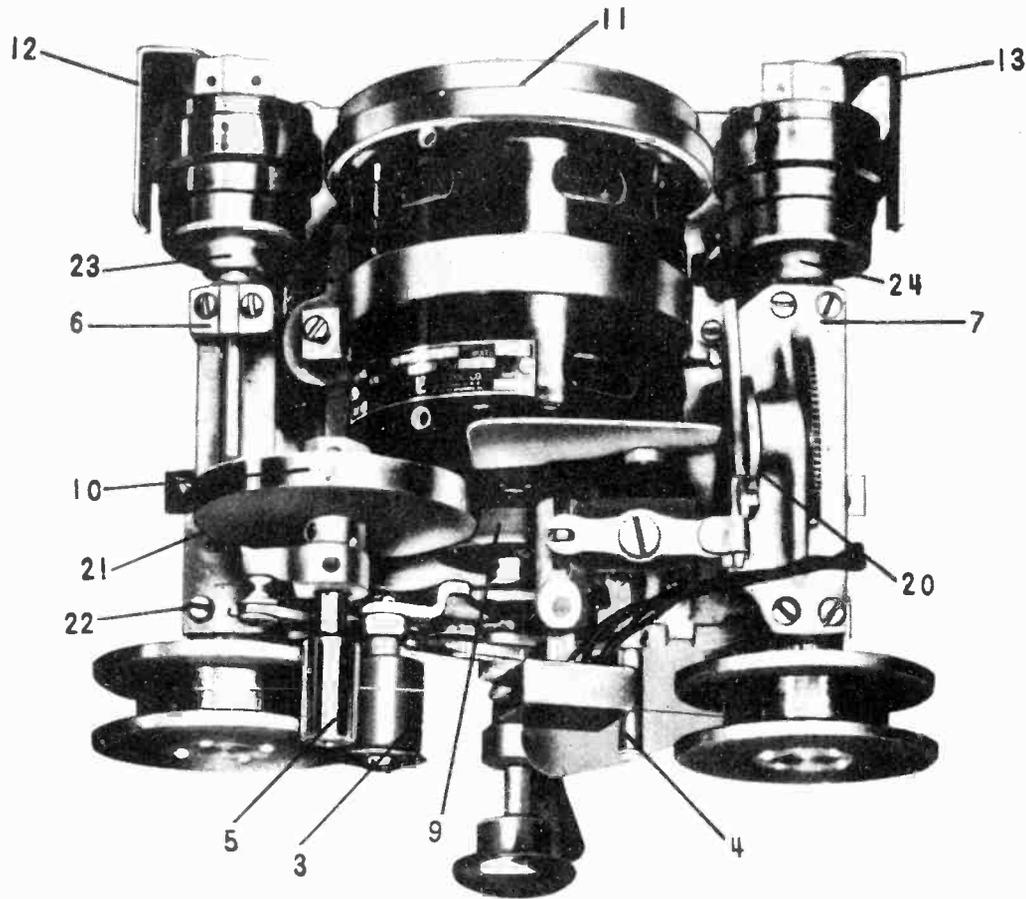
TOP VIEW - MODEL A-1 WIRERECORDER
